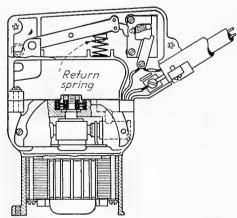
A conventional-type switch of old design that is self-opening when the trigger is released but can be held in the closed position by means of a locking pin. Common to all the switches shown in this group of designs, it is not dustproof.
